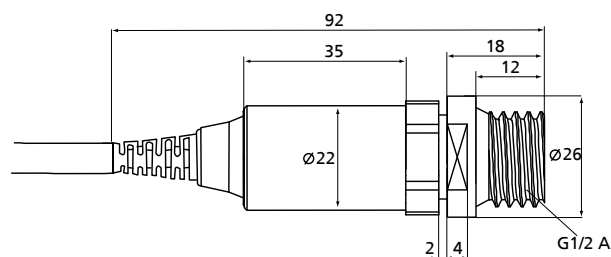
Dimensions of sensor, measuring range 65 bar and above
